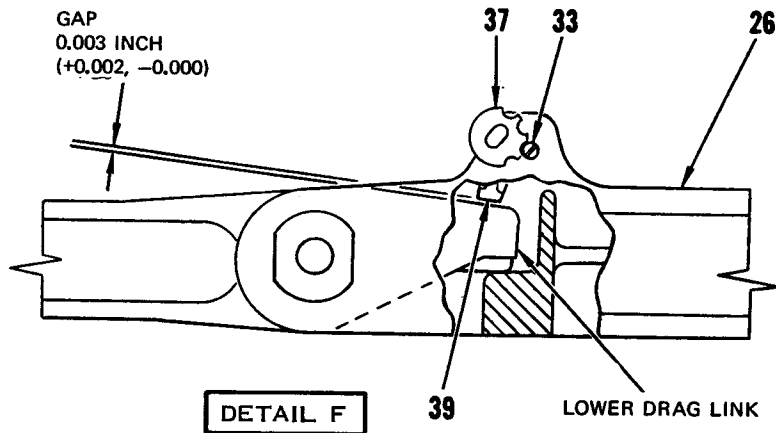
Nose Gear Upper Link Assembly Removal and Installation (Sheet 2)
